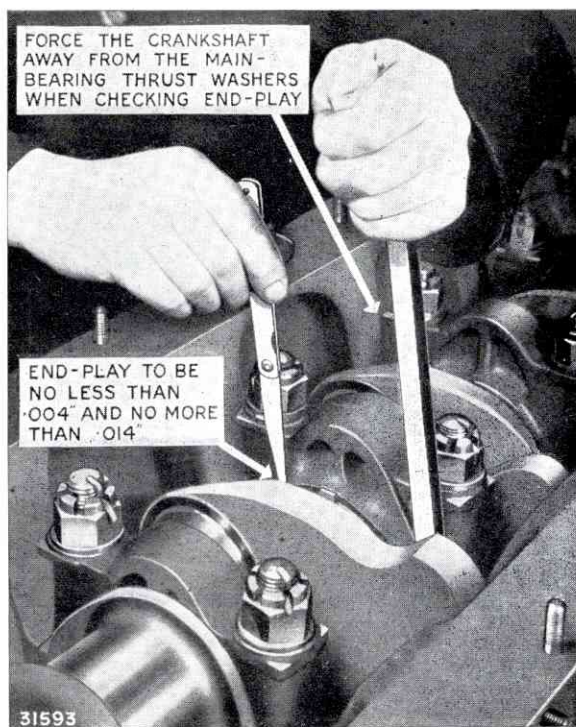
CHECKING CRANKSHAFT END-PLAY
